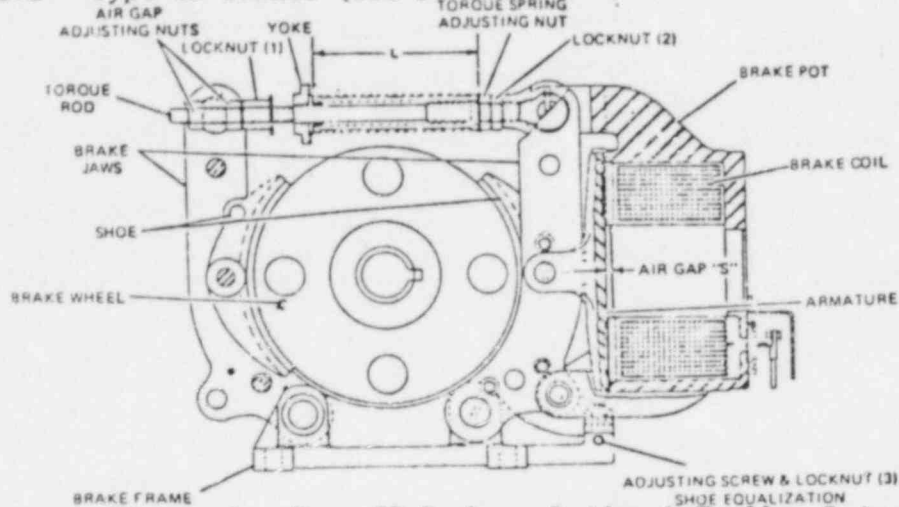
Type CD Brake - Bridge & Trolley Drive
